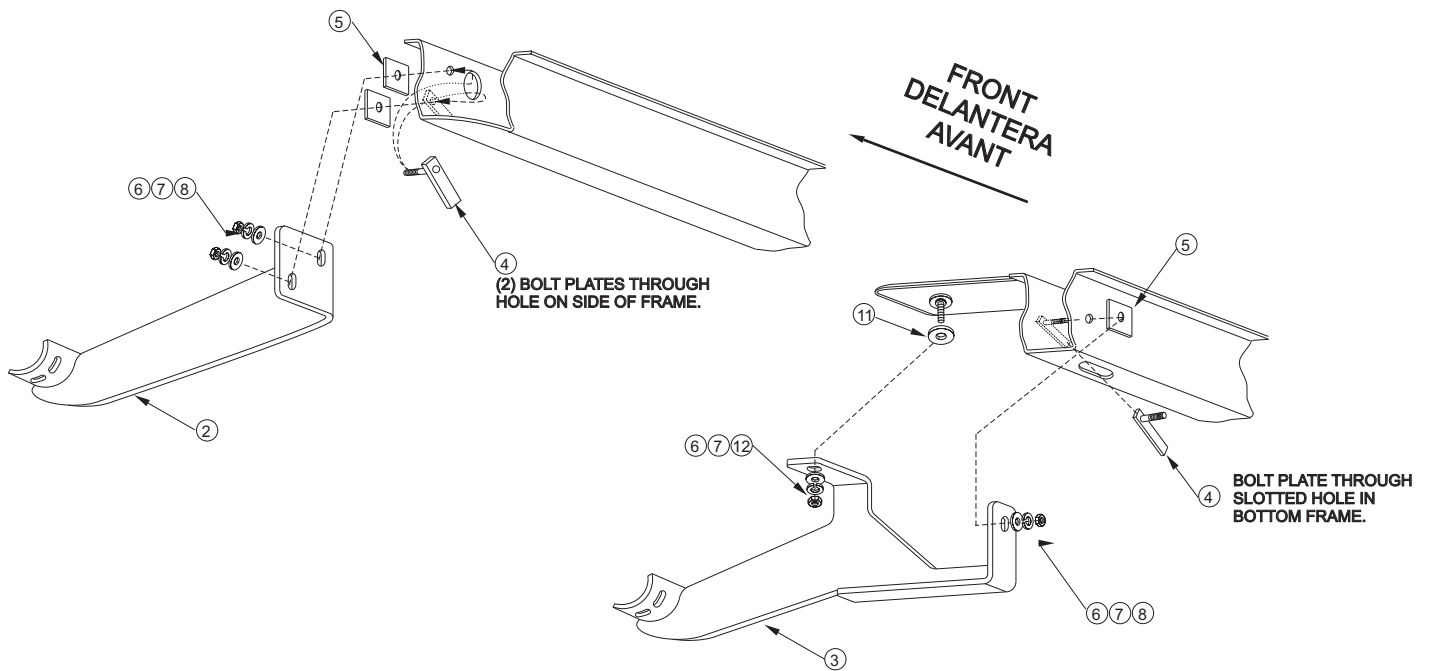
PASSENGER SIDE INSTALLATION SHOWN
